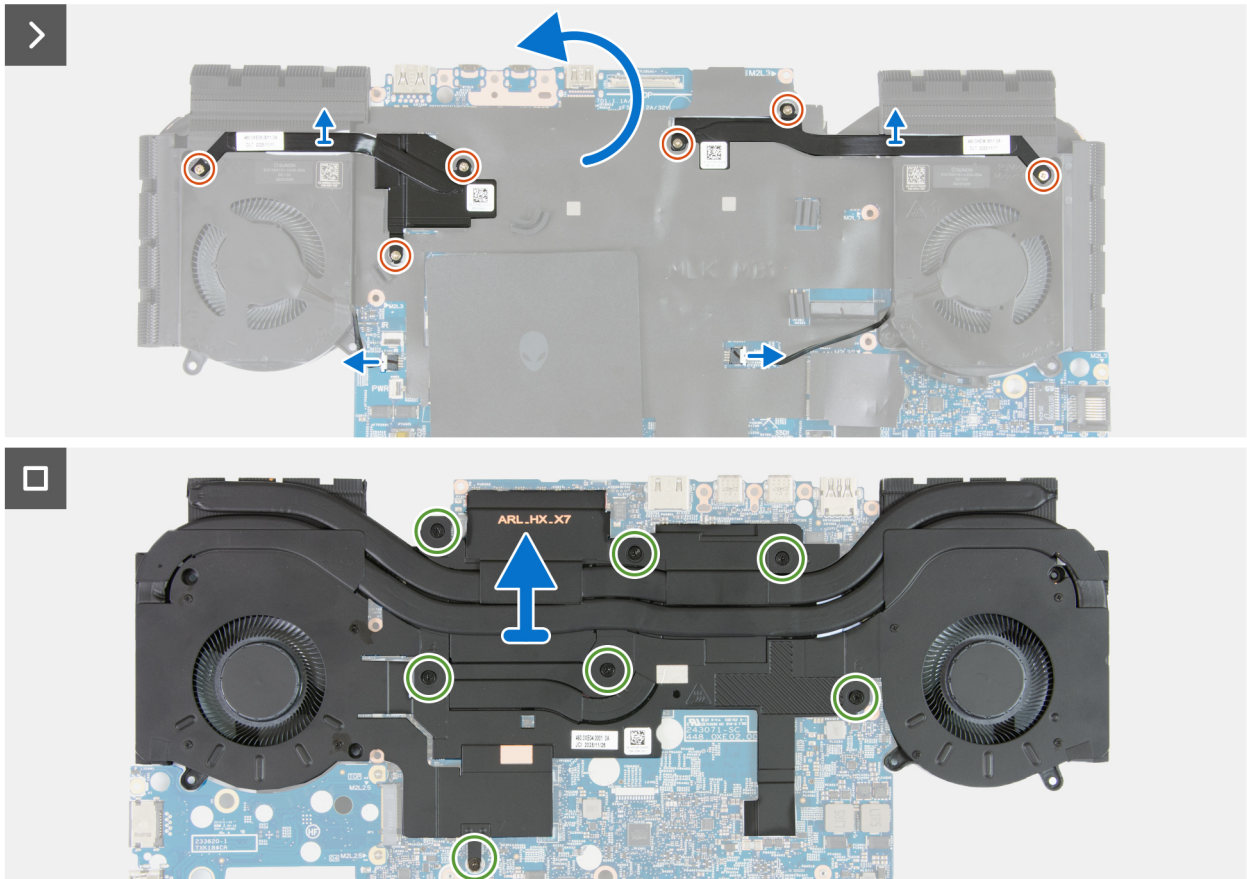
Removing the system-board assembly (for computers with VR heat sinks)
